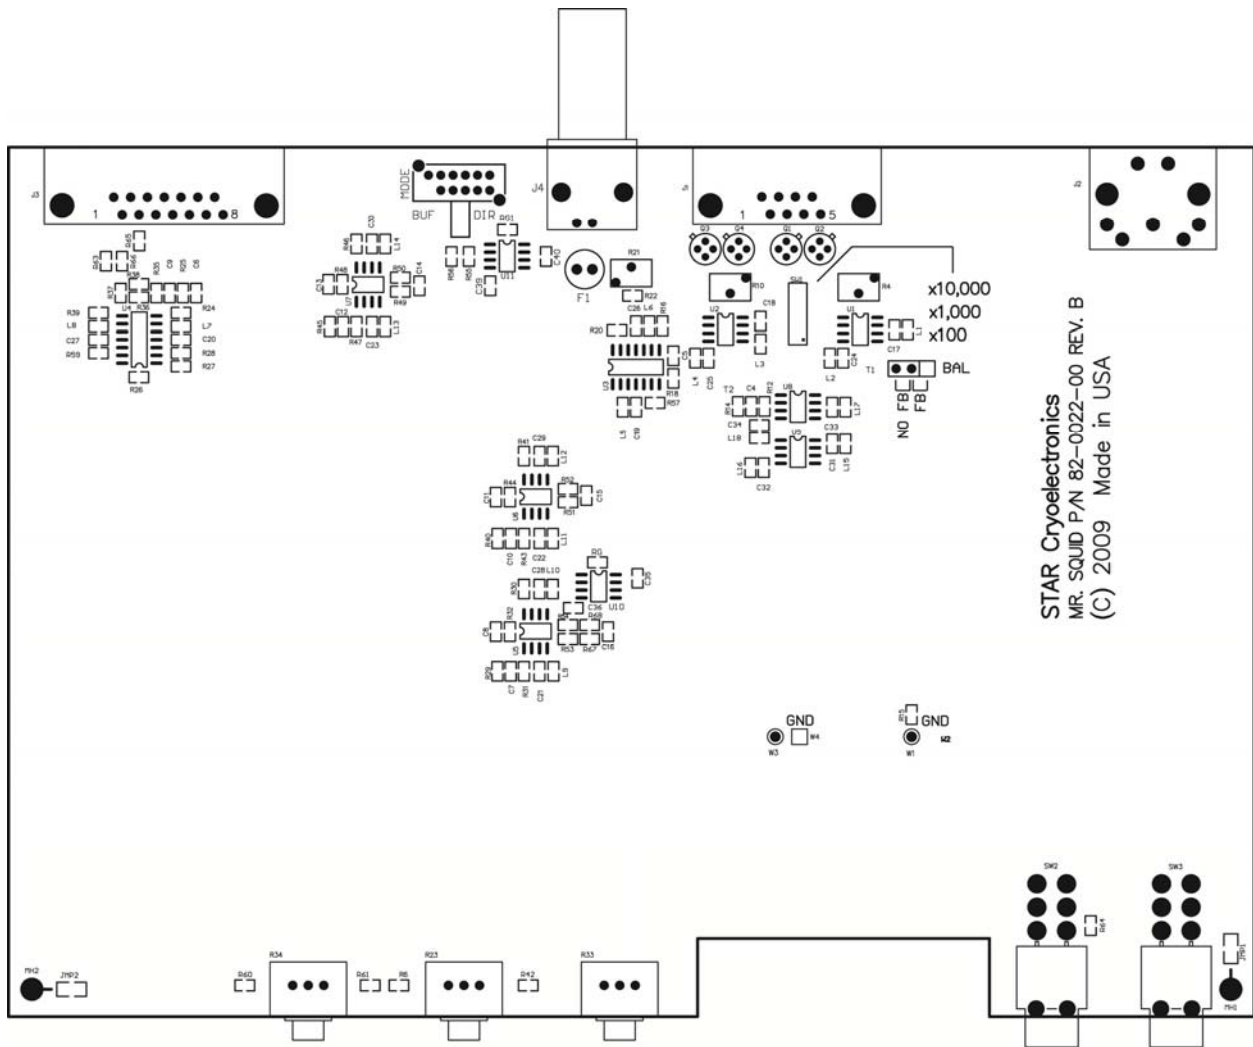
Assembly drawing of the MS-EB03 control electronics board.
